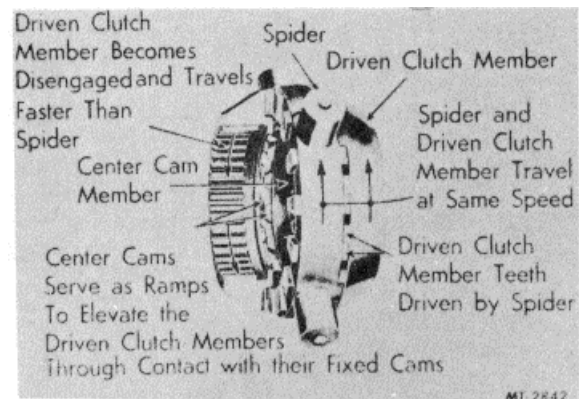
Forward Right Hand Turn (Cross Sectional View)
